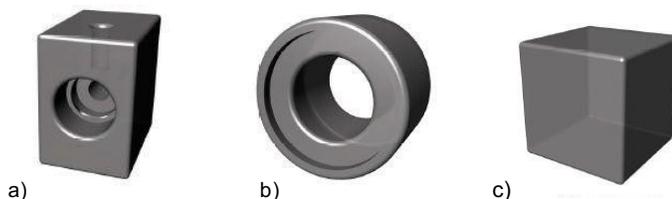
Drawing of a) the fiber coupler (without lens), b) the wedge holder (without wedge) and c) the mounting cube.
